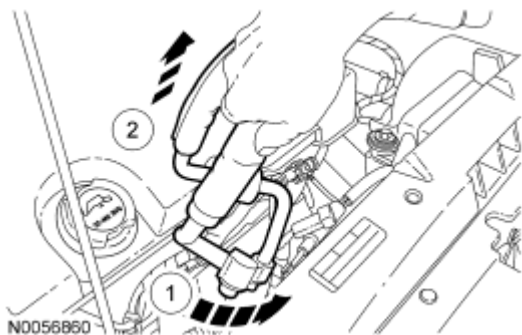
Rotating Compressor Manifold & Tube Counterclockwise
